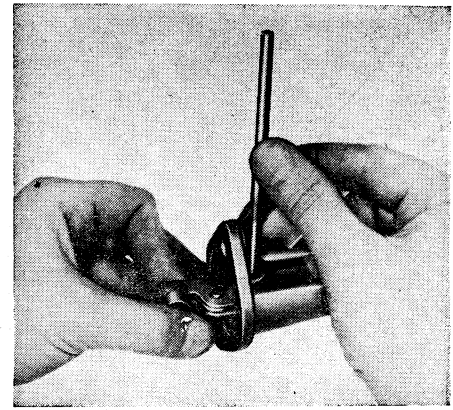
Series R. Use of assembly pin to hold rocker arm and link in place
